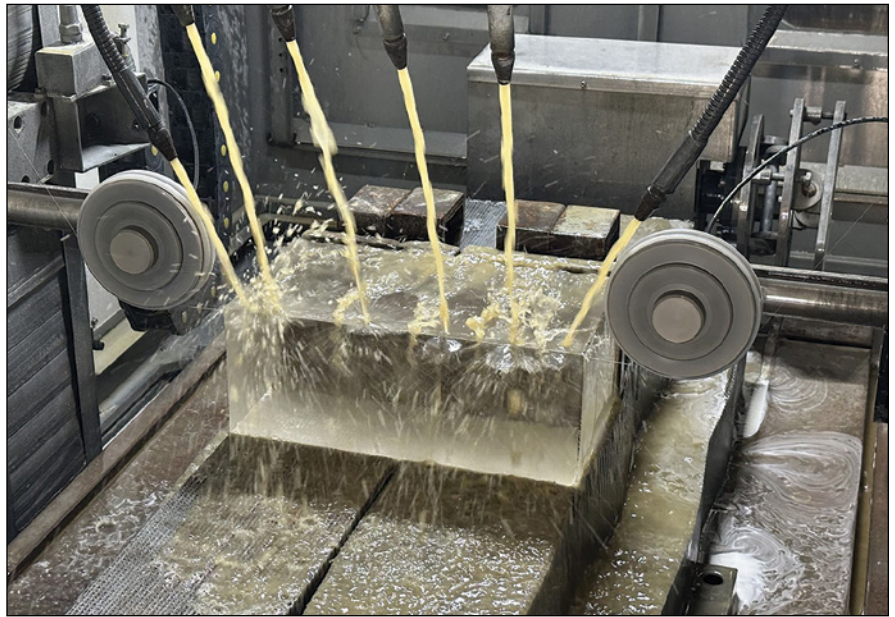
Shows the diamond wire saw cutting blanks to precise thicknesses before loading into the DSP machine.
